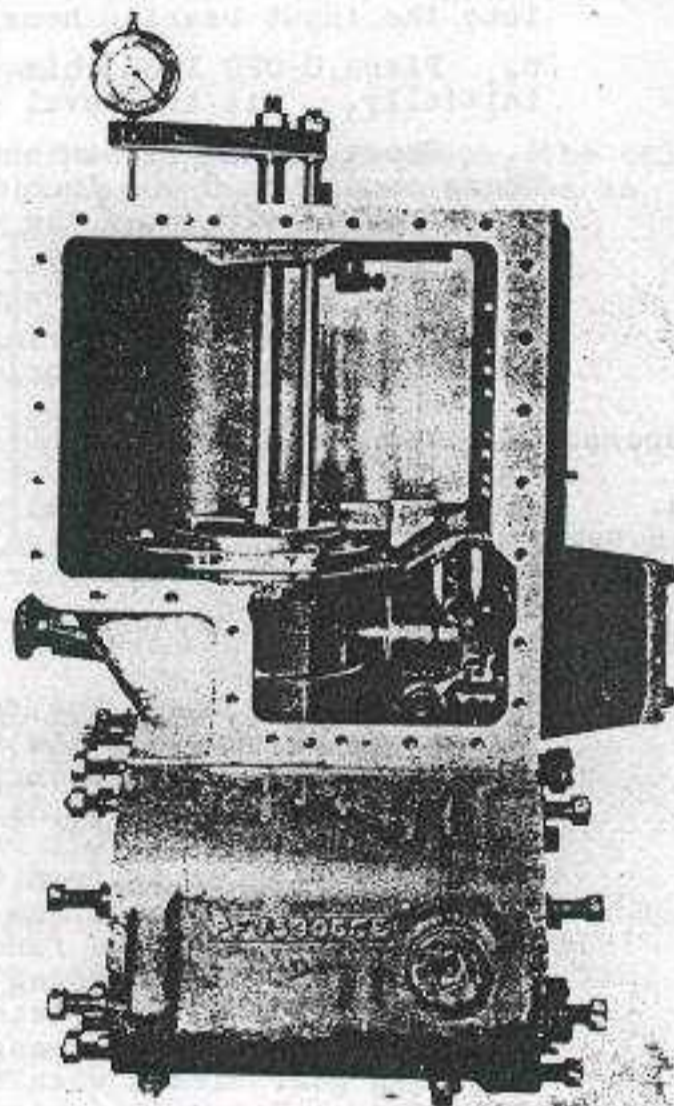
GEARBOX - CHECKING DEPTH OF GEARCASE TO RUNNING GEAR (SEE FIG 15)
